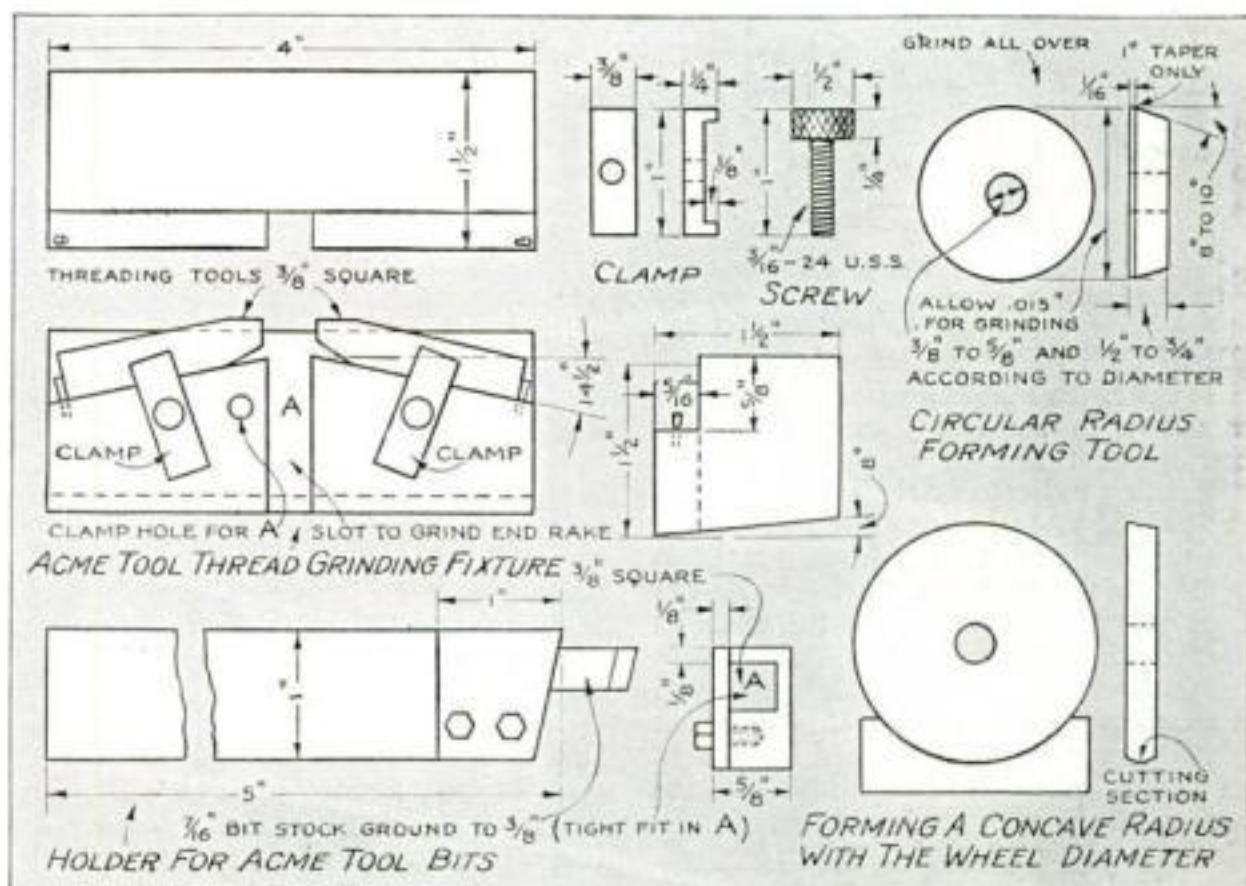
How the fixture for forming threading tools is constructed; a holder for a threading tool; a circular radius forming tool; and how concave radii can be formed.
